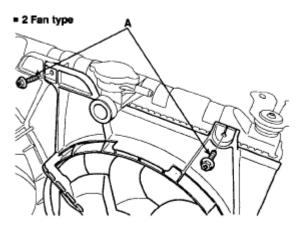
Identifying Radiator Upper Bracket (2 Of 2) Courtesy of HYUNDAI MOTOR CO.
